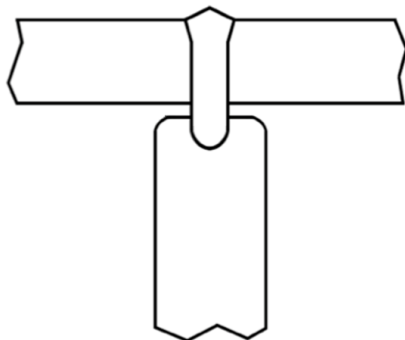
Laser stake weld connecting the face plate and core.
